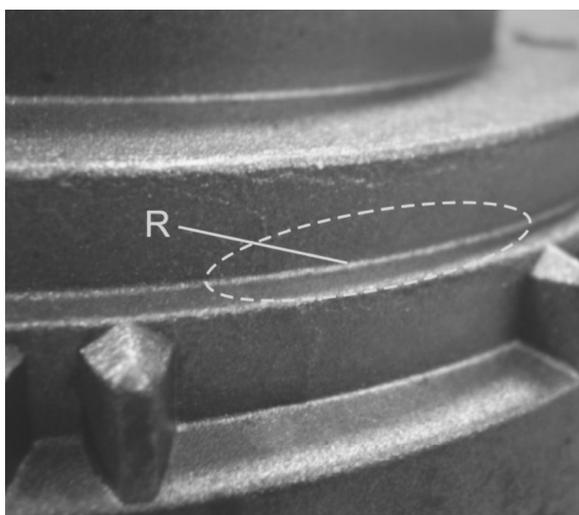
Steel synchronizer rings forging with marked R radius, whose value determines the durability of the die
